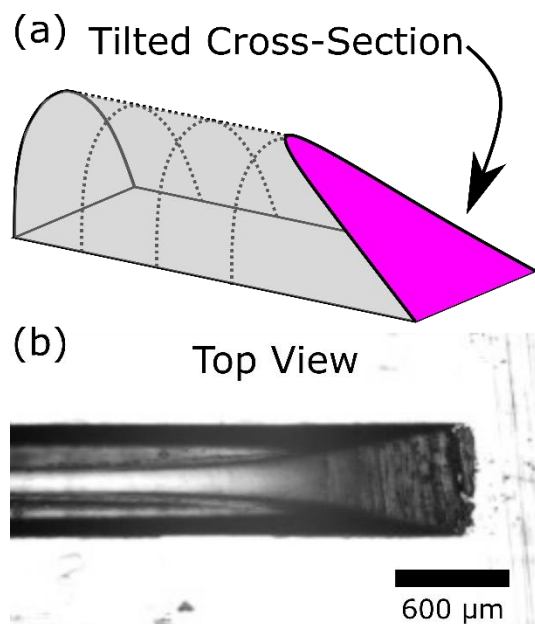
Schematic drawing of the 3D printed line with its tilted cross-section in (a) and the top view of a 3D printed line with an exposed tilted cross-section in (b).
